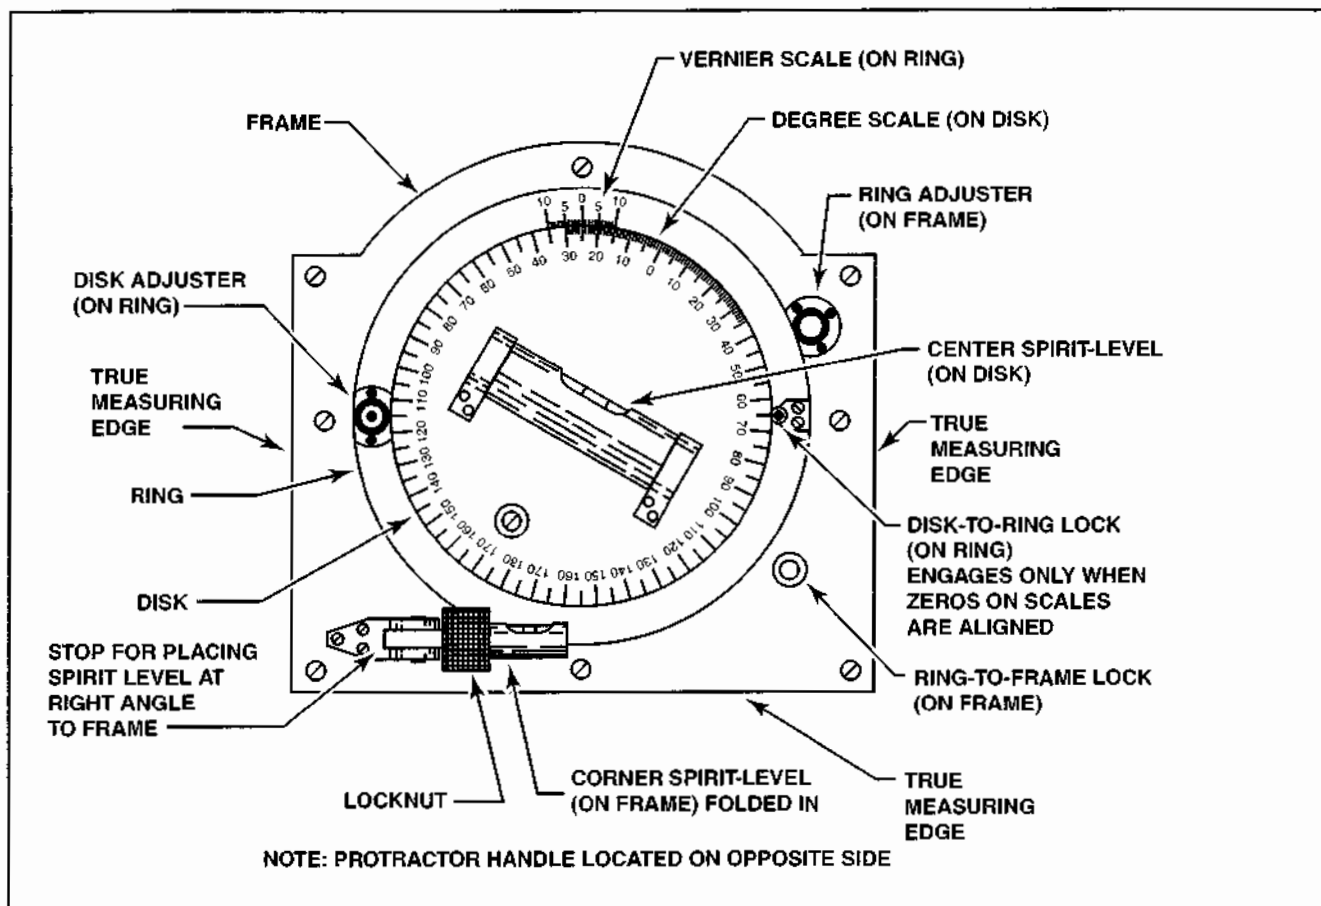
A universal propeller protractor is used to check propeller blade angle.
